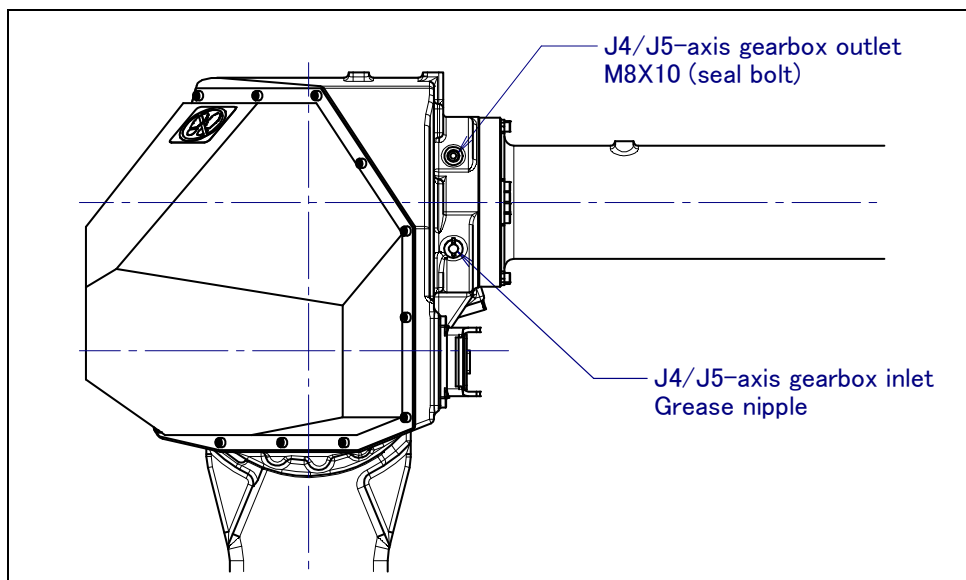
(b) Replacing grease of the J4/J5-axis gearbox(M-710iC/50H)
